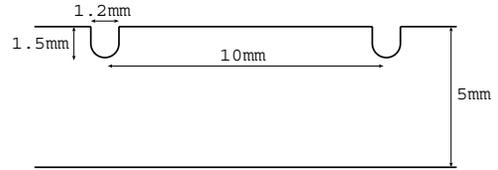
Magnified figure of cross section of the samples: Both samples - injection molding and casting- were made into the same figure. Injection-molding samples have grooves when they were made in the mold. BC-400 was used as a sample of casting plate. Machine tools were used to make grooves on this BC-400 plate.
